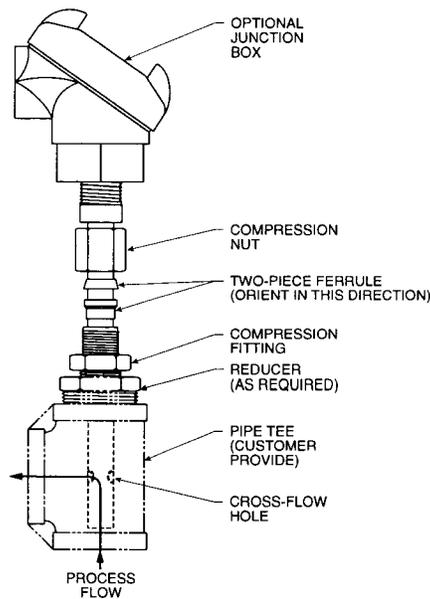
Compression Fitting Parts Arrangement For Insertion Mounting
